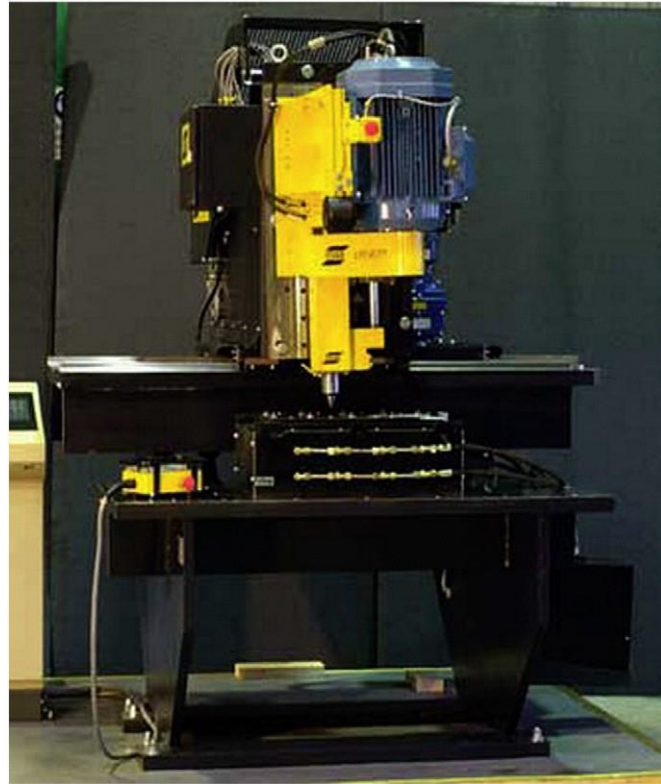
dedicated FSW machine - FSW Legio™ [54]
